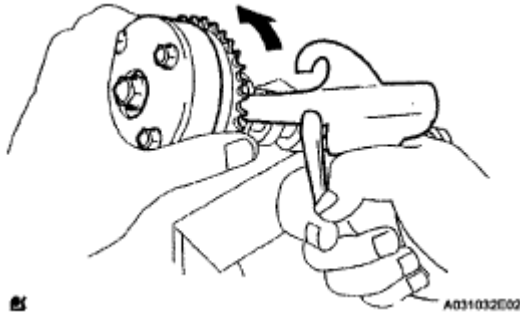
Turning Camshaft Timing Gear To Advance Direction
